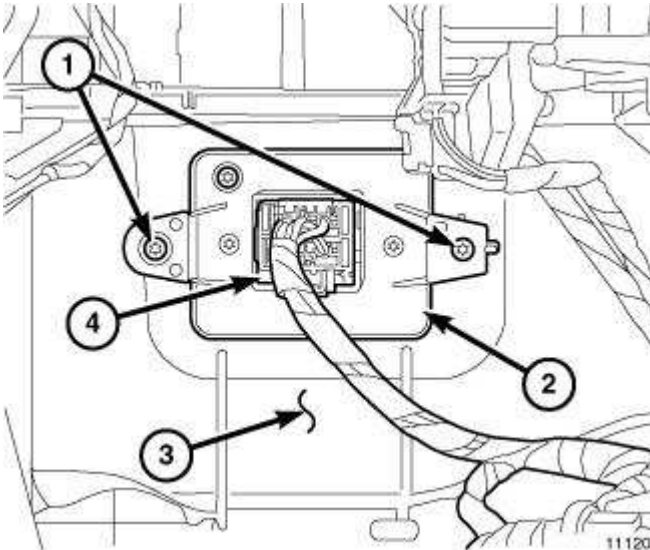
Identifying Screws, Blower Motor Resistor, HVAC Housing & Wire Harness Connector
